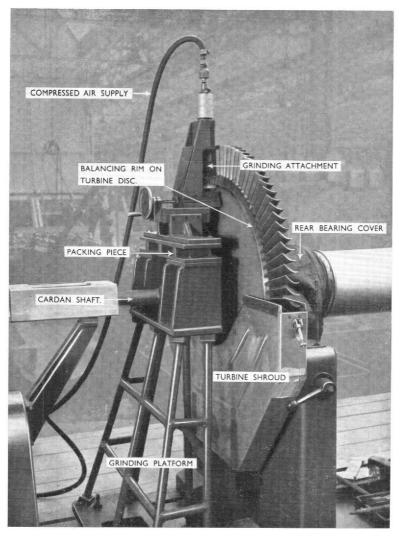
Grinding attachment used to correct unbalance at turbine end of main shaft assembly.
